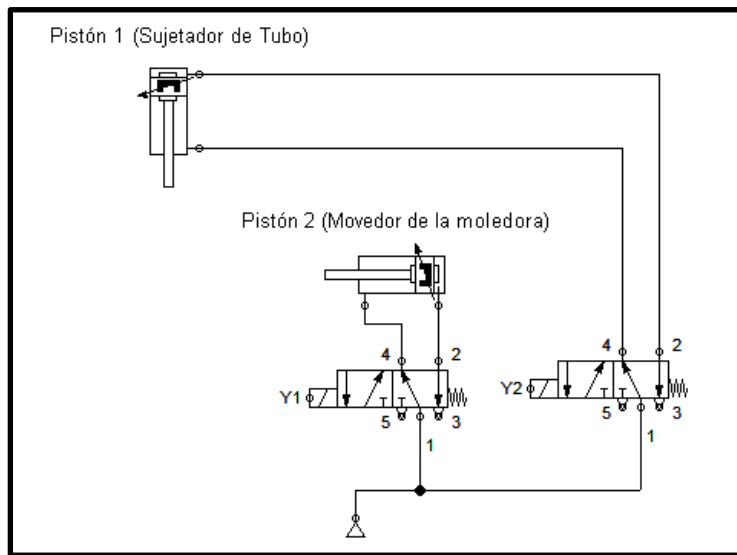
Electropneumatic circuit of the tube cutting machine.
